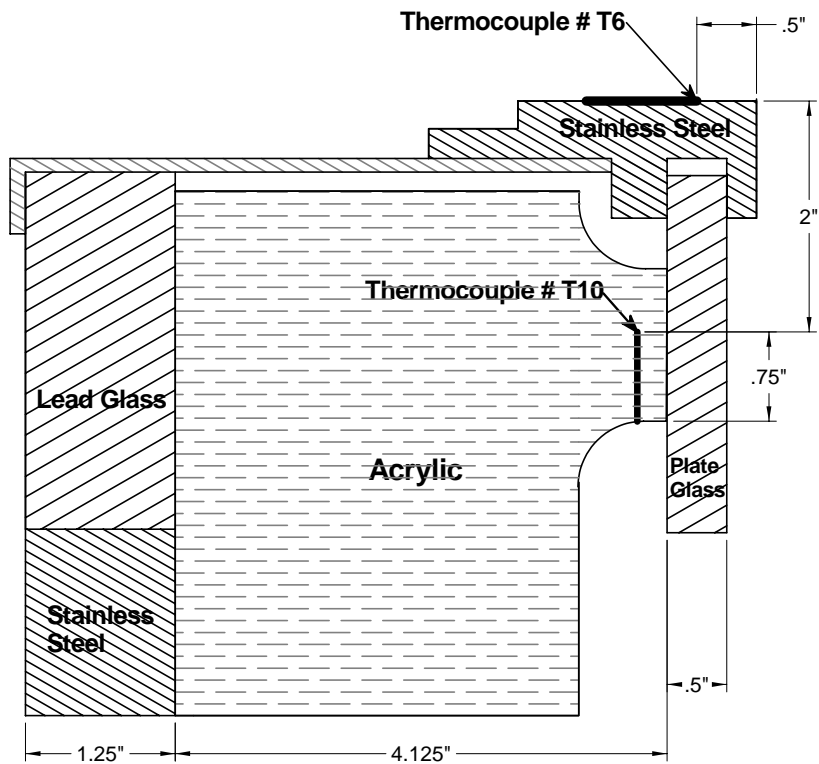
Detail Sketch of the Lower Thermocouple Locations
